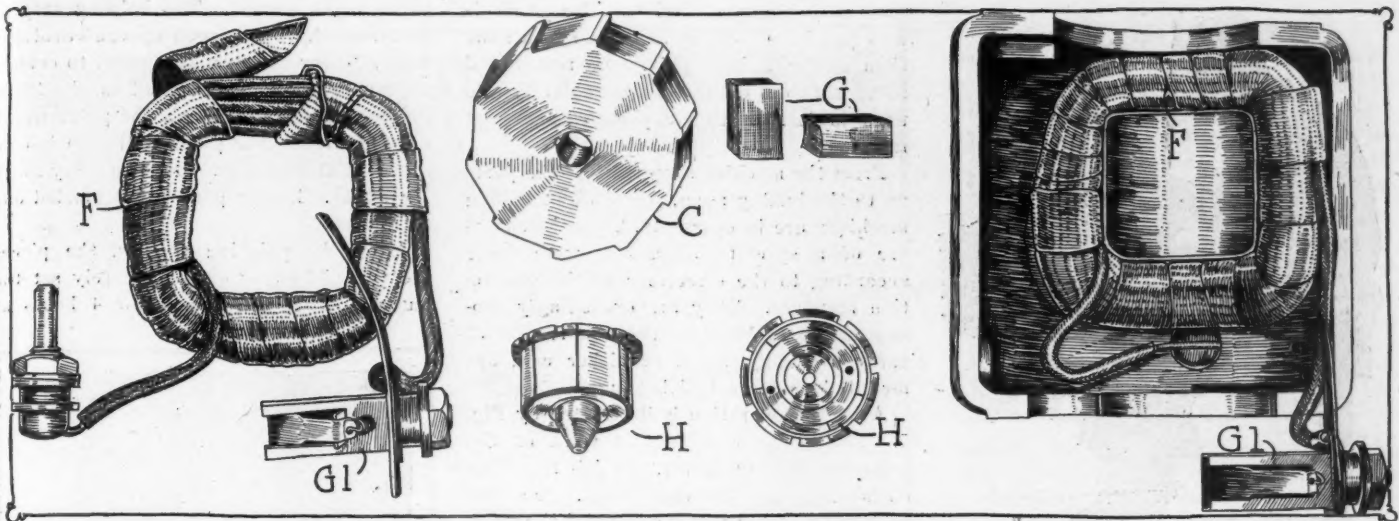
MANY PARTS ENTERING INTO THE KLAXON ELECTRIC MOTOR
